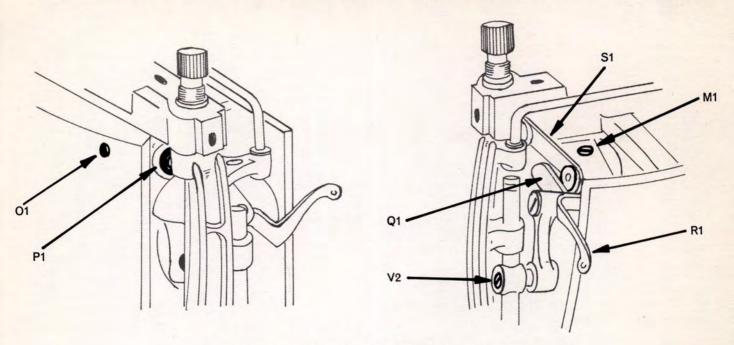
Thread Take-up Mechanism to Eliminate End Play or Binding in Thread Take-up Mechanism.
